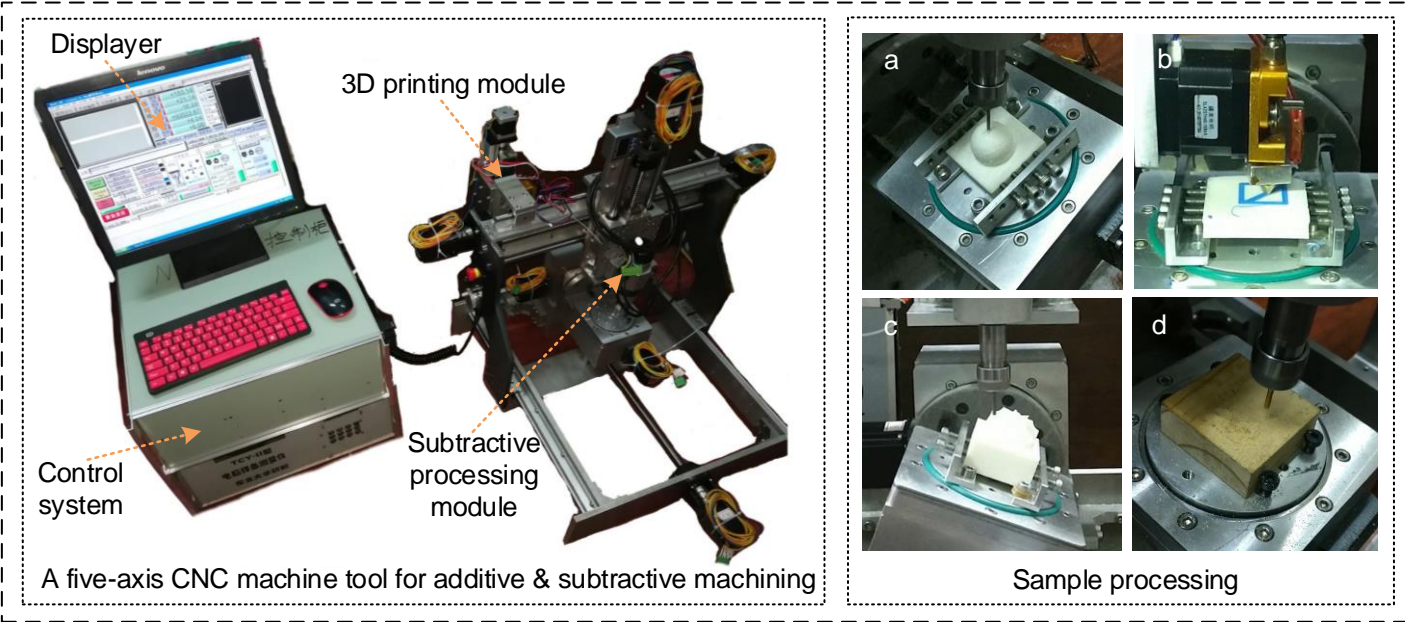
Figure I. A Small 5-Axis CNC Machine Tool for Additive and Subtractive Machining
